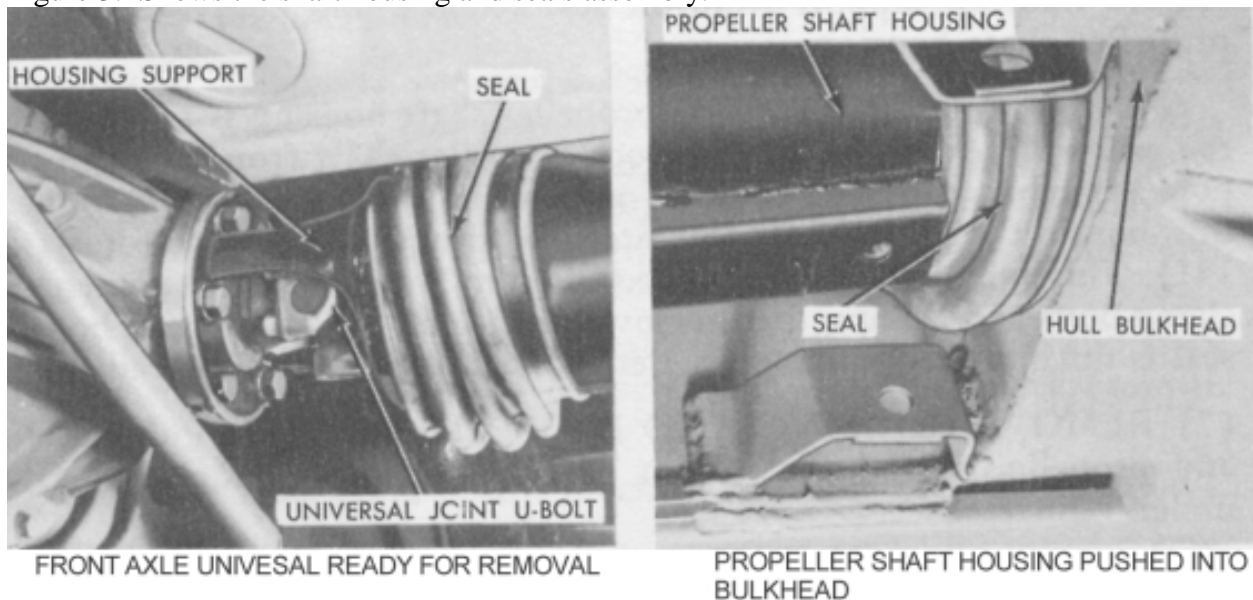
Shows the housing support at the differential, now informally called a torque tube saddle or a bird cage. Figure 4b: Shows the hull mounts for the shaft housing hinge assembly, near the end of the shaft housing
